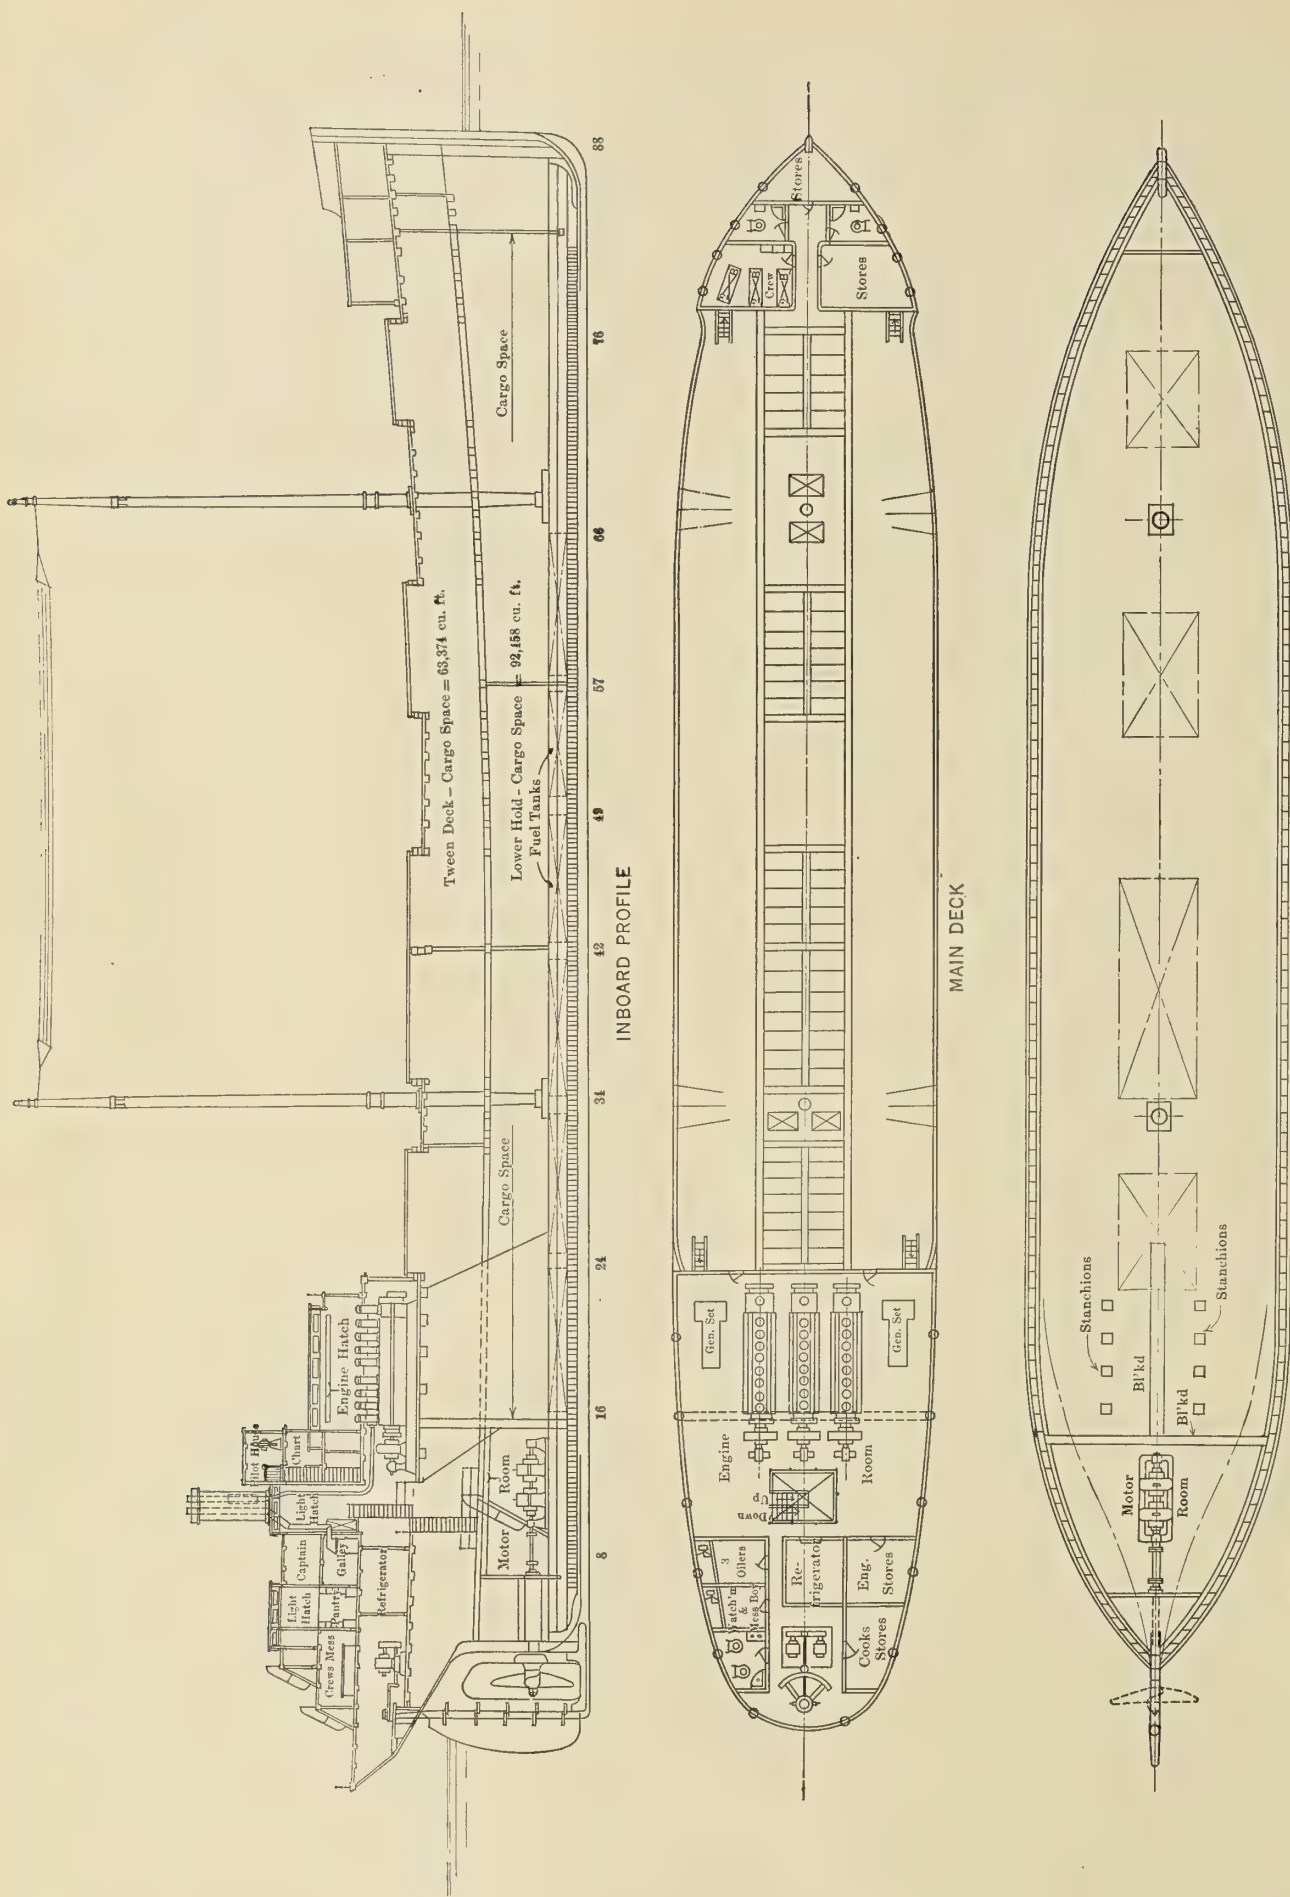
Inboard Profile and Deck Plans, Showing Machinery Arrangement of Converted Ferris-Type Hull
